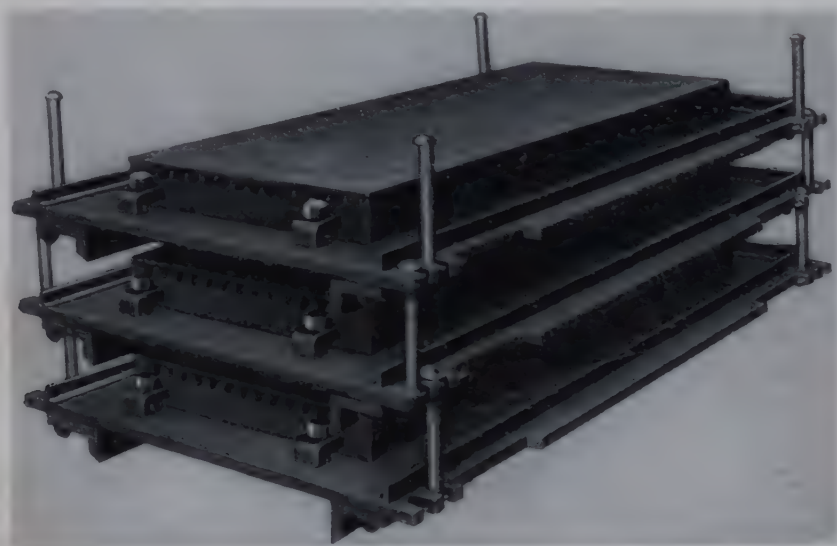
Press-box assembly, for use in box press (courtesy *The French Oil Mill Machinery Co.*).
